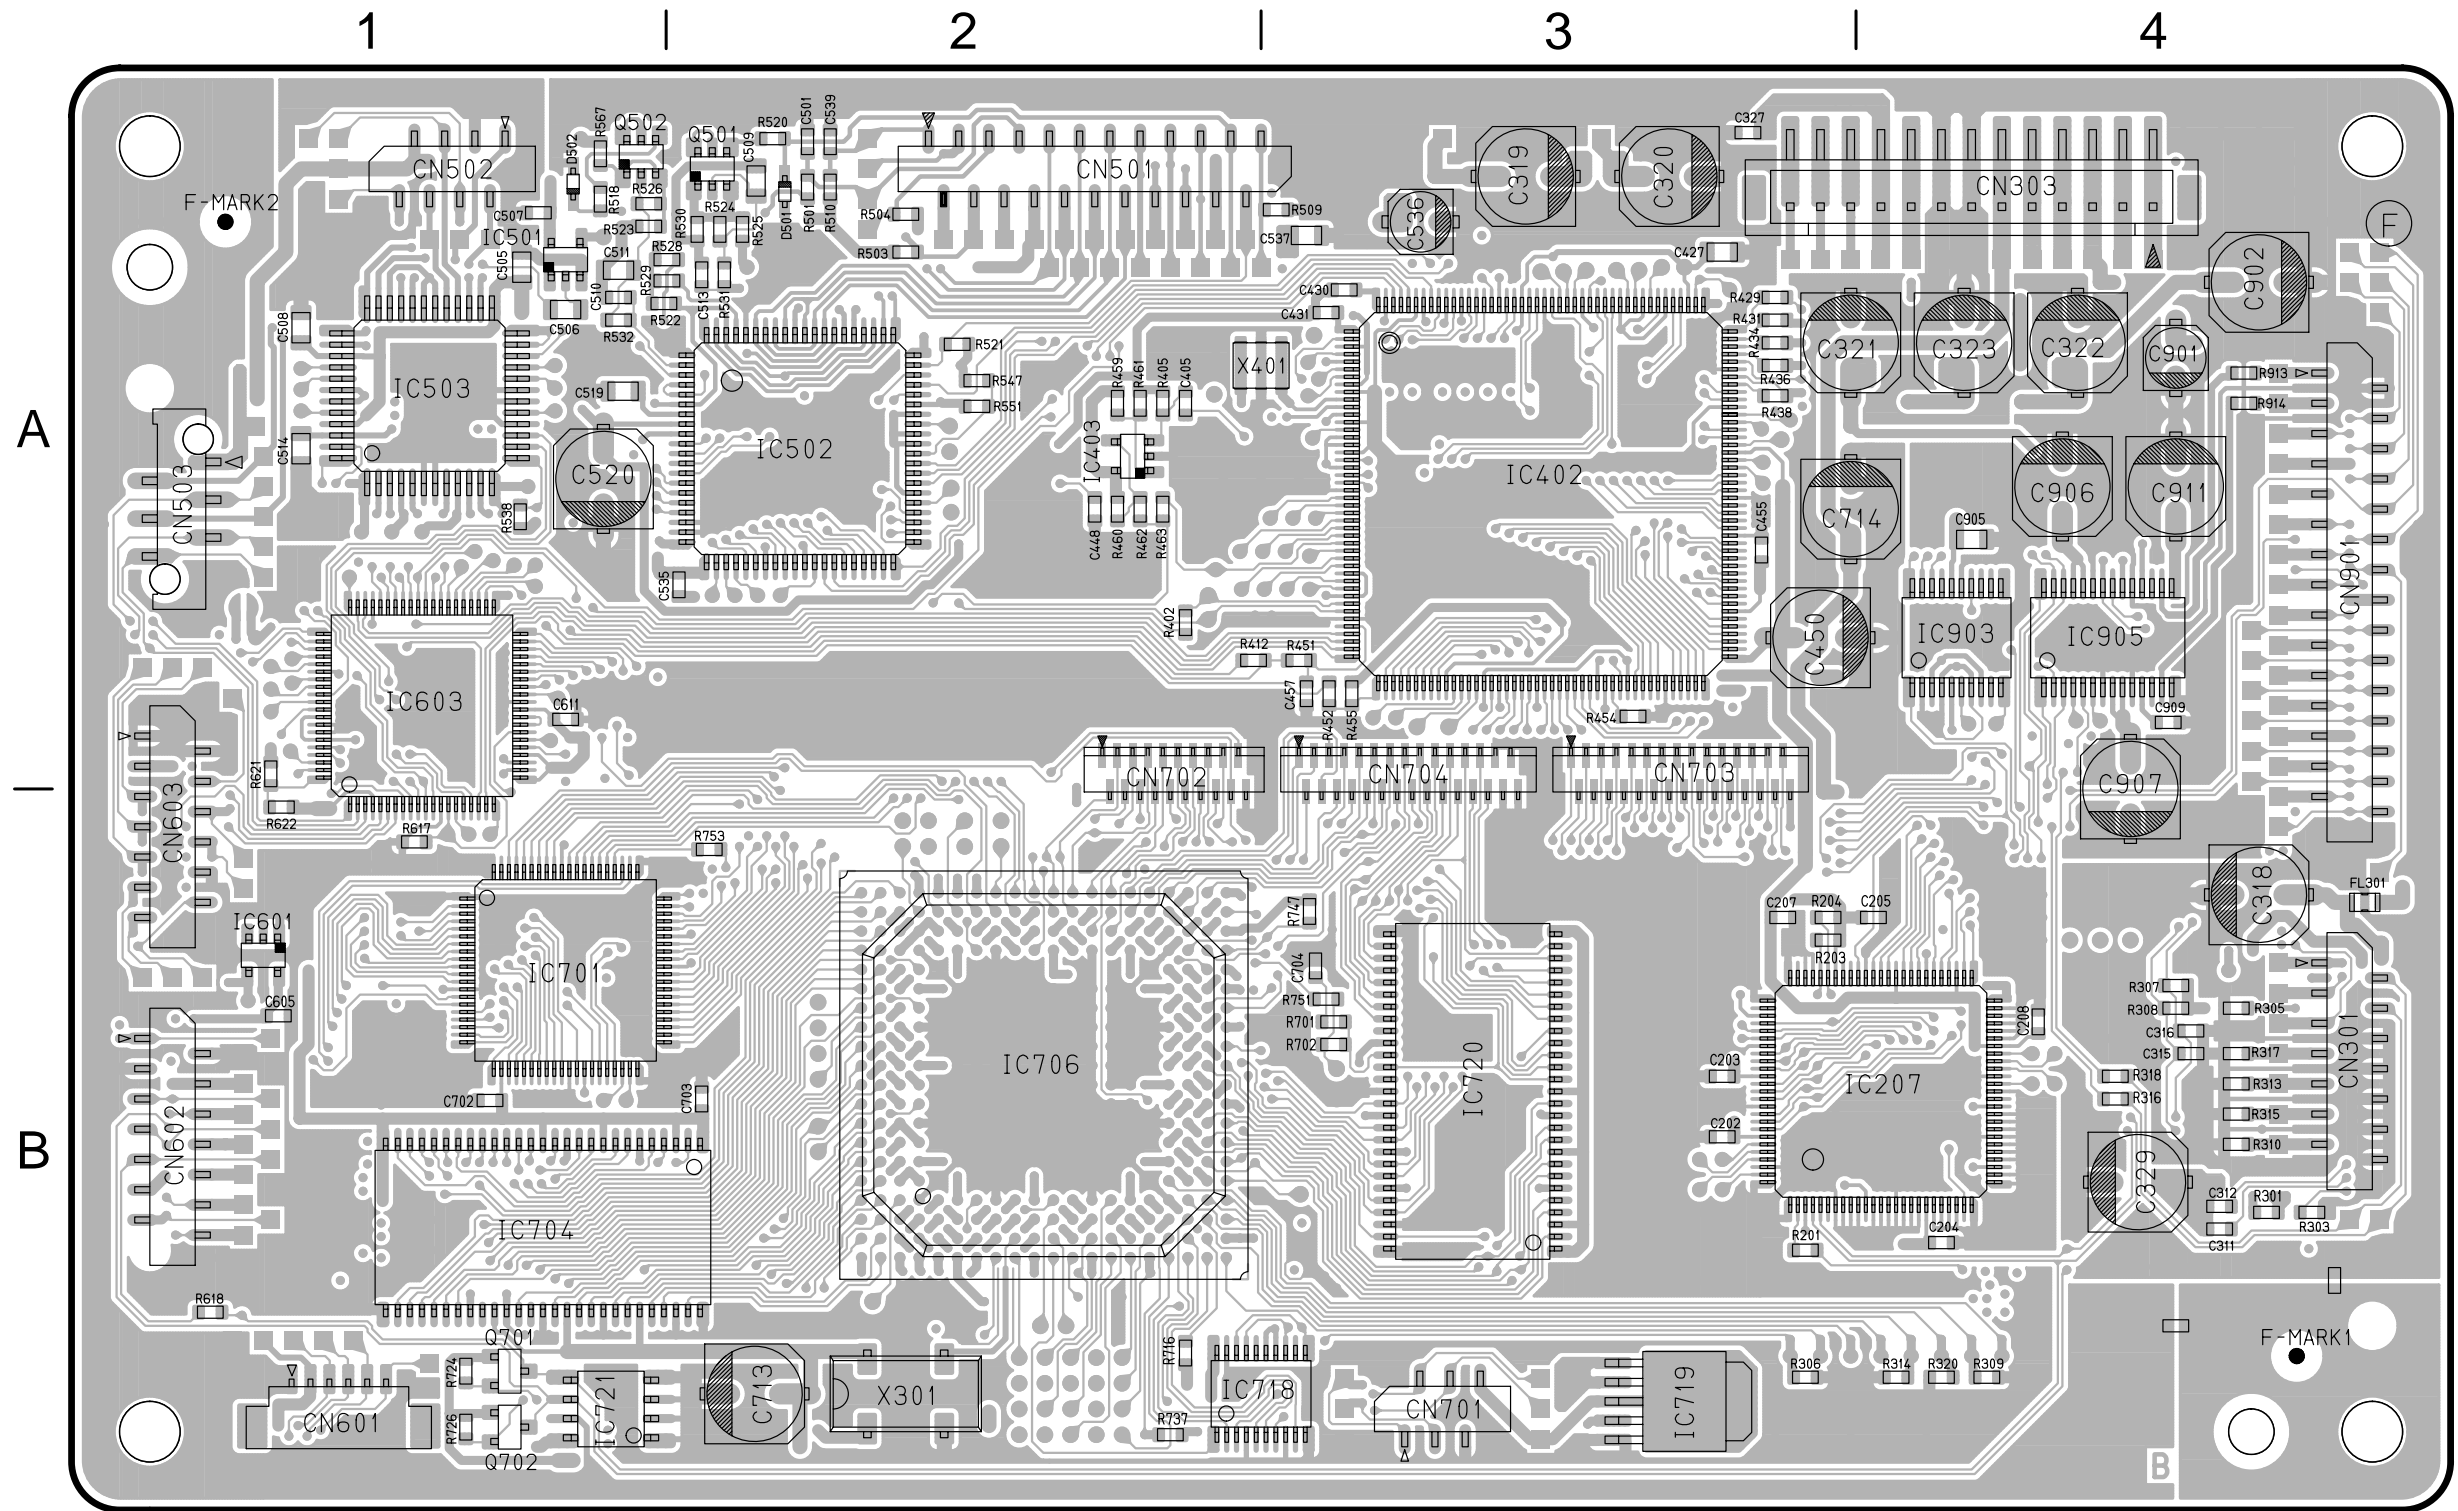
EU01 Main PC Board (Top pattern and Top parts location diagram)
